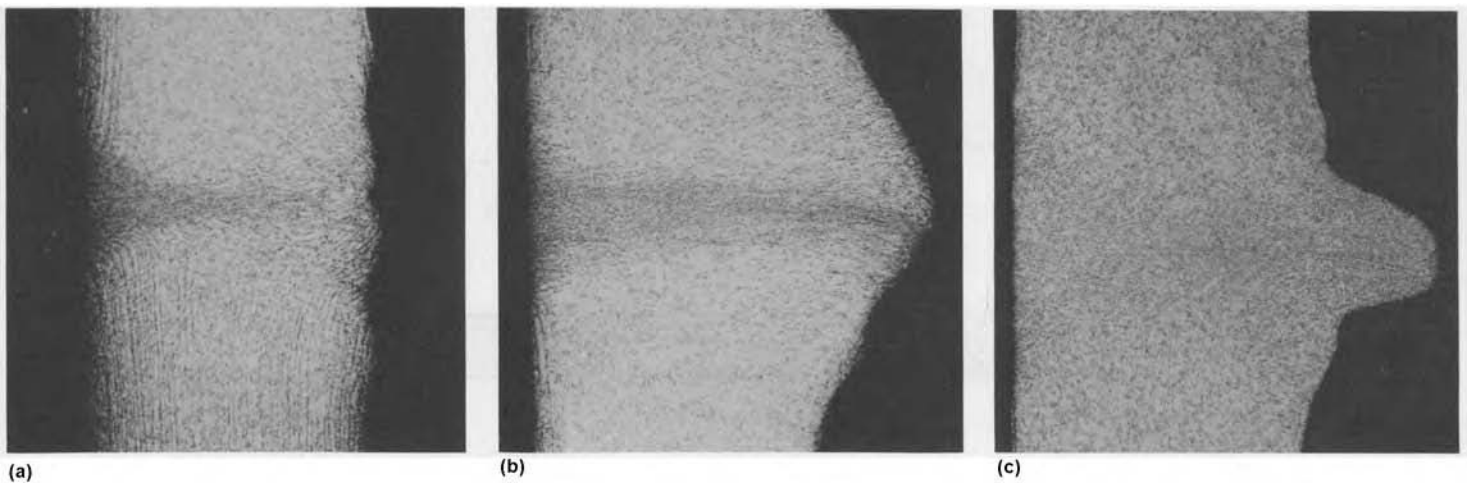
Upset weld configurations in butt welds of pipe with an outside diameter of 25 mm (1 in.) and a wall of 3 mm (0.1 in.). Upset has been machined from the outside surface (on left). The internal upset configuration was controlled by adjusting weld parameters and joint design. (a) Minimum upset. (b) Large upset. (c) Narrow upset at low force. Courtesy of Westinghouse Savannah River Company
